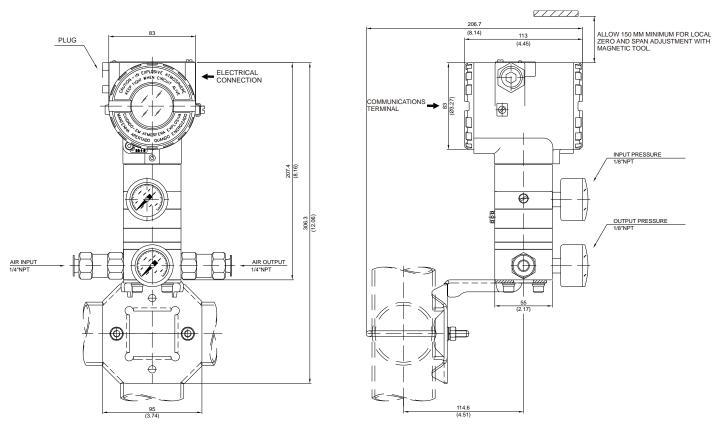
Converter Dimensional Drawing and Mounting Position
